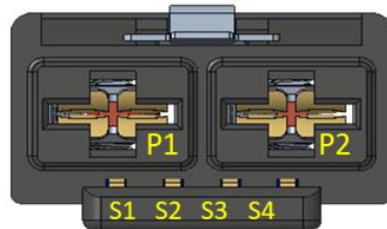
48VHPWR Auxiliary Power Connector Pinout, Plug Side
